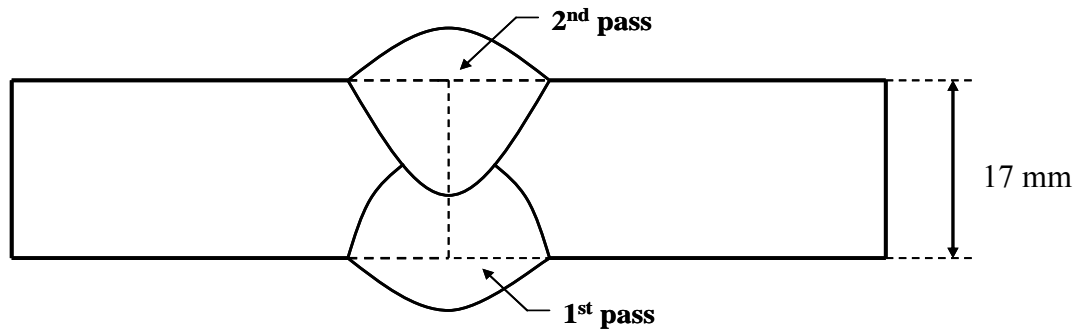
Schematic drawing showing the SAW weld joint geometry.
